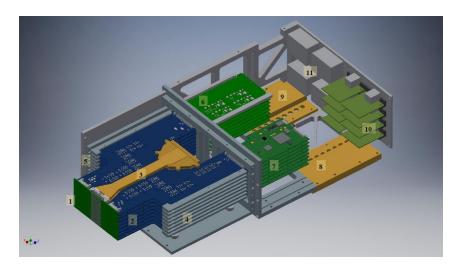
Scheme of the detection system: (1) detectors and related PCBs, (2) Front-End PCBs, (3) brass profile for liquid cooling, (4) insertion guides at the flanks of detecting heads, (5) rails for eight detection heads, (6) power supply and filters PCBs, (7) Back-End PCBs, (8, 9) cooling distribution inlet and outlet, (10) ethernet PCBs, (11) power supply connectors [10].
